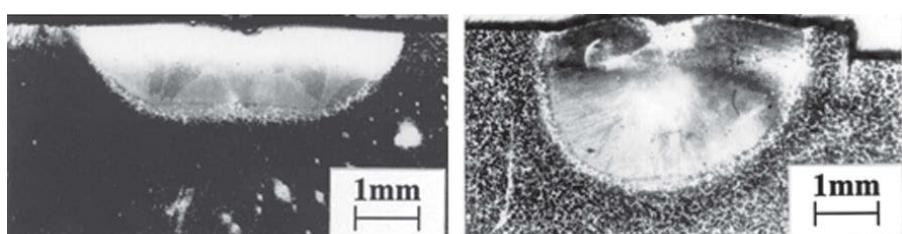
Weld cross sections of 15-mm-thick, high-speed steel plates containing 0.9% C, 3.9% Cr, 6.3% W, 4.8% Mo, 1.8% V, 4.6% Co, 0.2% Mn, 0.5% Si by weight containing 20 ppm sulfur (left) and 150 ppm sulfur (right) spot welded at a laser power of 5200 W for 5 s (Ref. 11).
